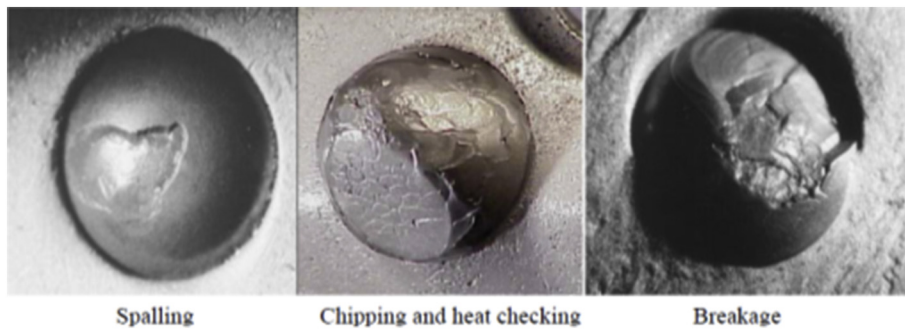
Typical failure modes of PDC inserts for rock drill bit (after [18]).
